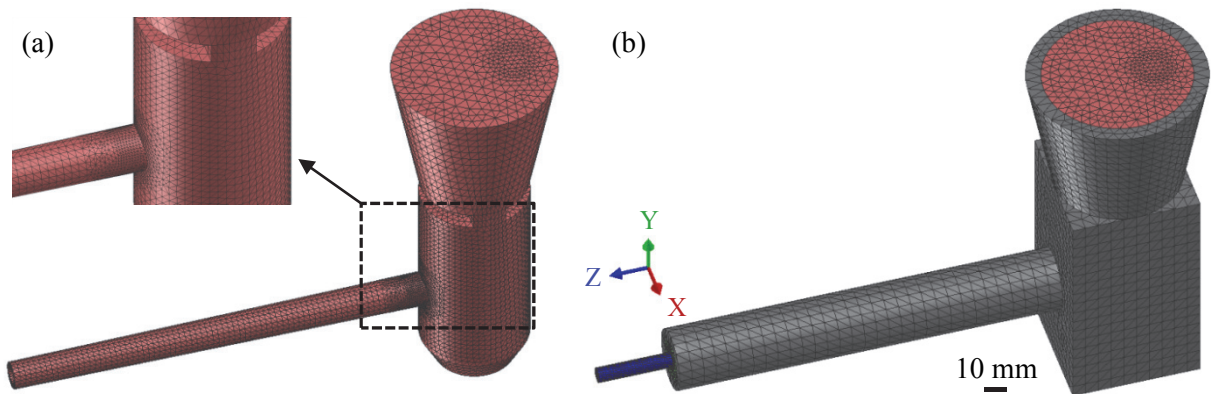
Computational meshing of the casting and mould: (a) casting, (b) mould
